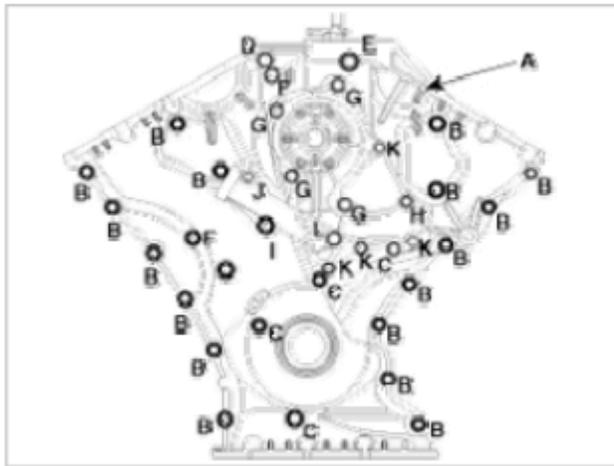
Identifying Timing Chain Cover Bolts Tightening Torque
